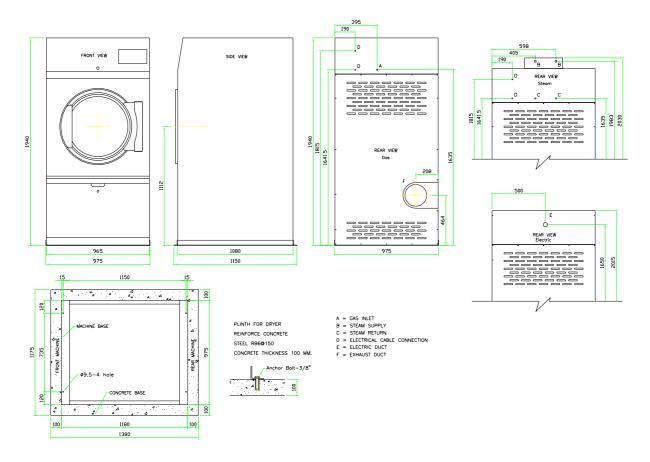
Dryer Model DE50 lb. Technical Dimension
